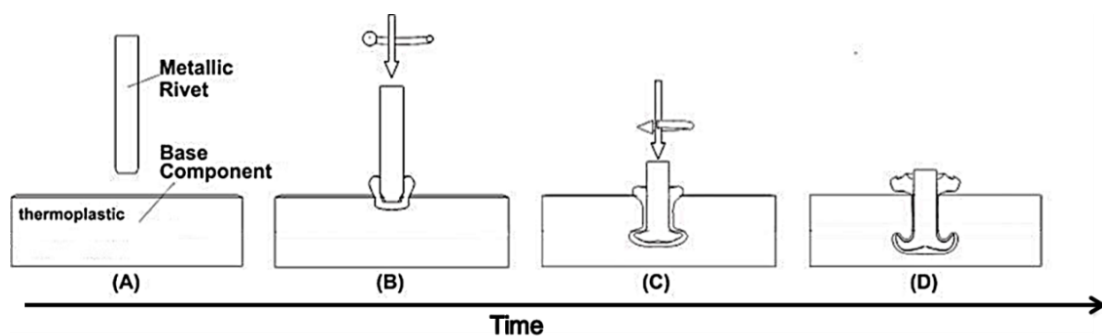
Simplified scheme of the Friction Riveting process for the “metallic-insert joint” configuration: start position of the joining parts (a); rotating rivet is insert in the polymeric plate (b); deceleration and rivet forging (c) consolidation of the joint (d) [11].
